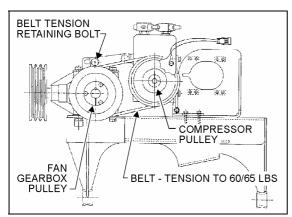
A/C COMPRESSOR (DRIVER'S OR AUXILIARY SYSTEM)
